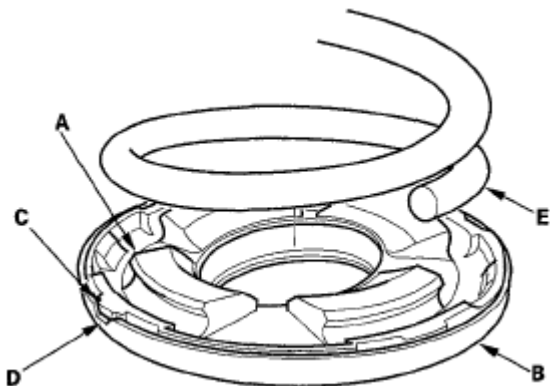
Identifying Upper Spring Mounting Cushion, Upper Spring Seat, Tab Portion And Cutout
